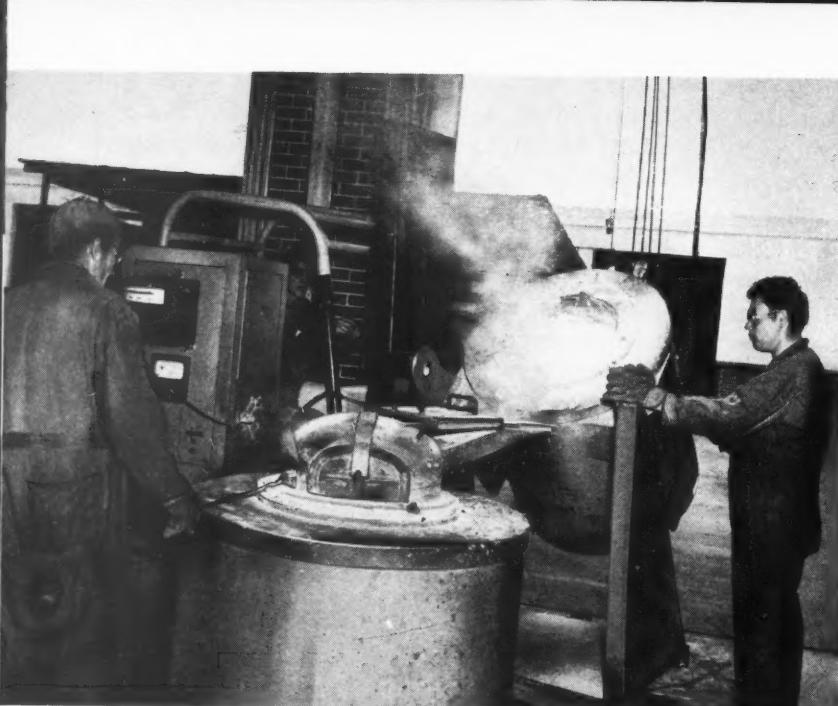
Transferring molten magnesium from a transporter pot held on a lift-truck to a holding pot at one of the die-casting machines
